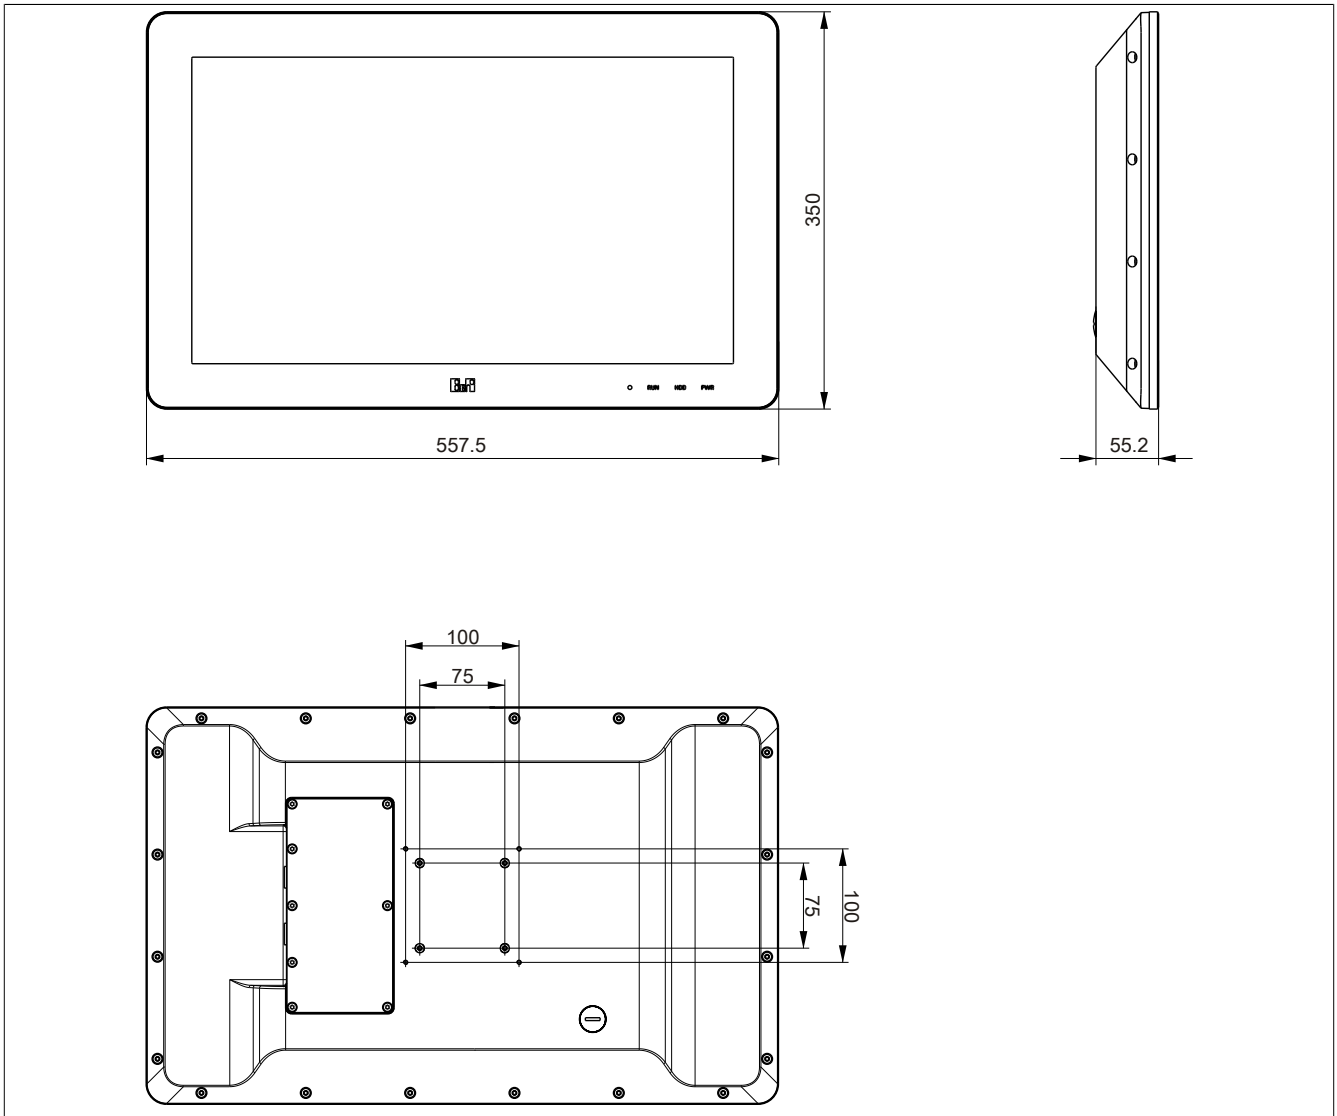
5AP830.215C-00 Rev. A0 - Dimensions
